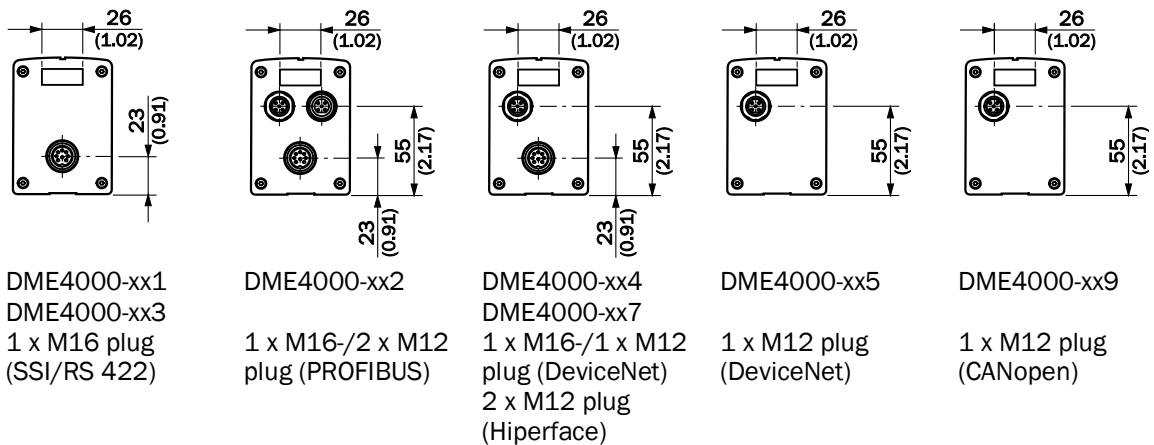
DME4000 Dimensional Drawings  Rear View
